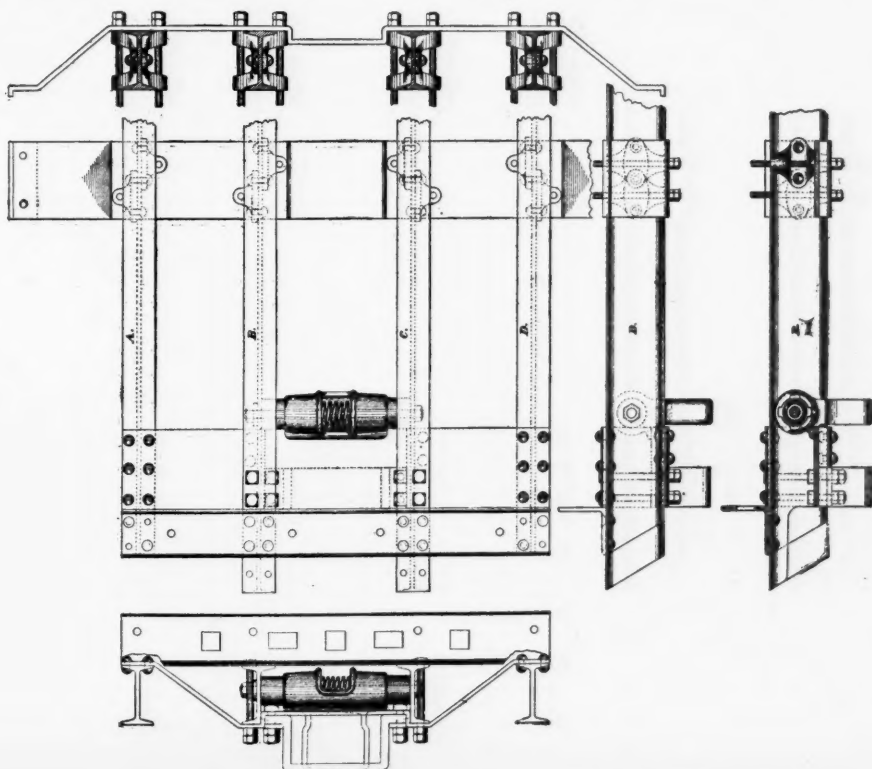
Plan, Elevations and Sections of Standard Steel Platform.
